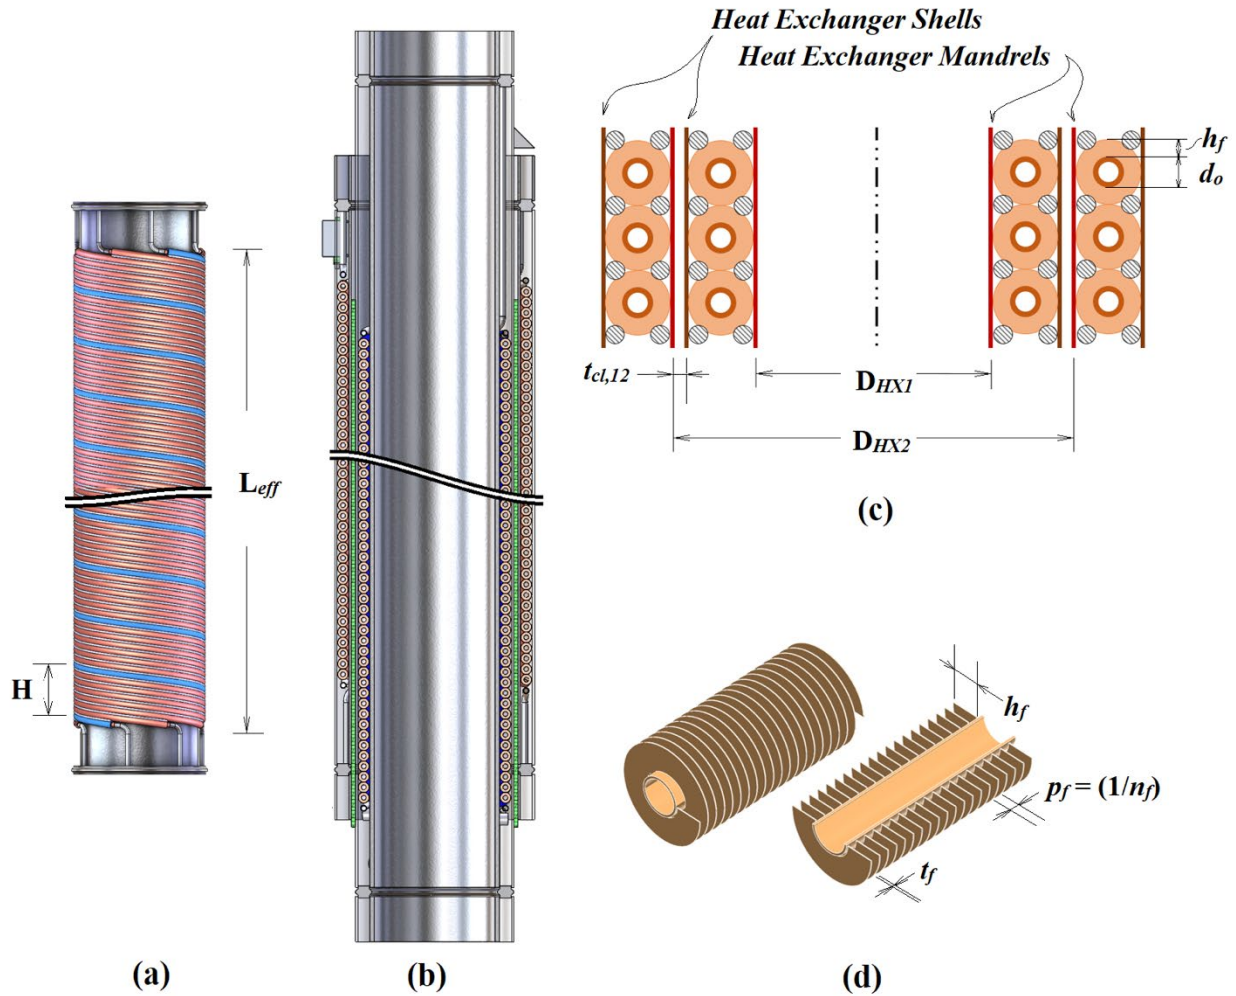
Schematic representation of (a) HX-1 showing parallel finned-tube passes (blue line represents one single pass of helically wound finned-tube), (b) overall heat exchanger assembly cross-section showing HX-2 nested inside HX-1 (c) cross-section of freeze
